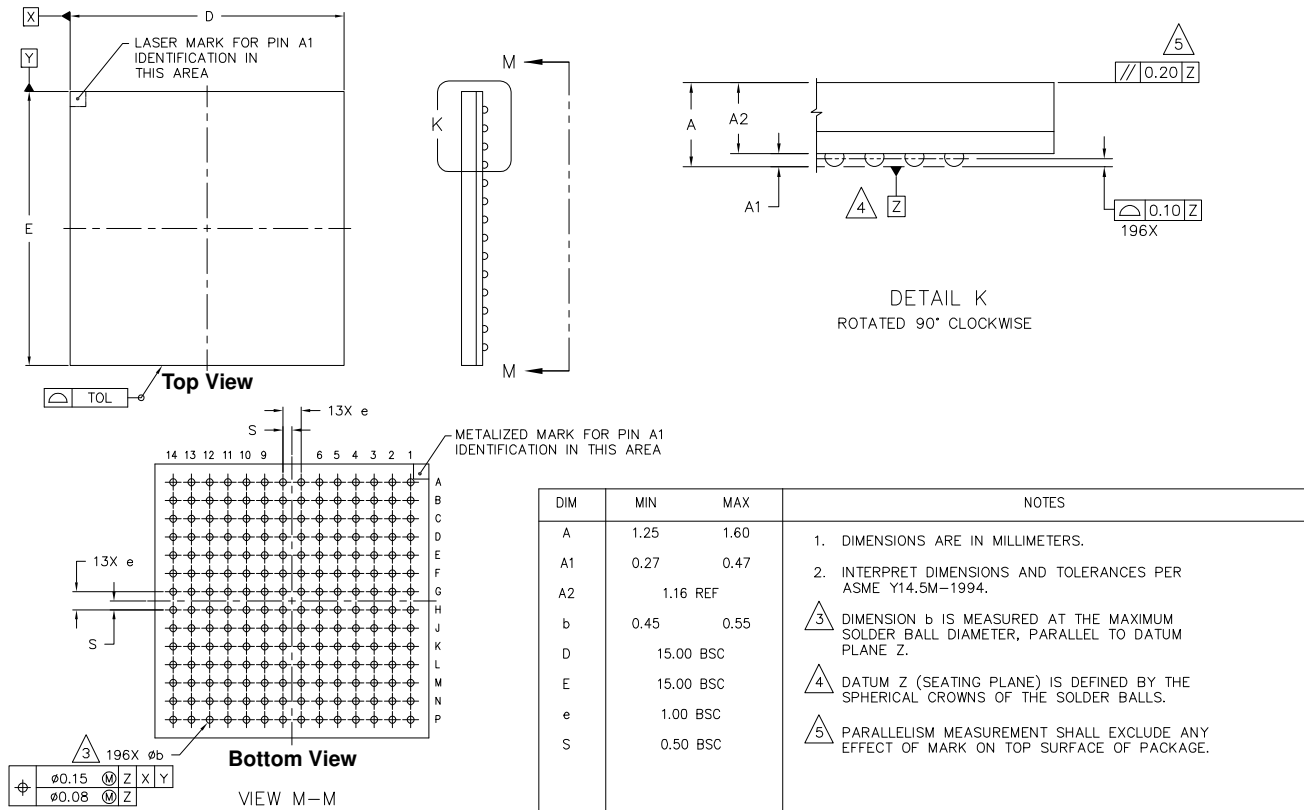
MCF5208CVM166 Package Dimensions (196 MAPBGA)
